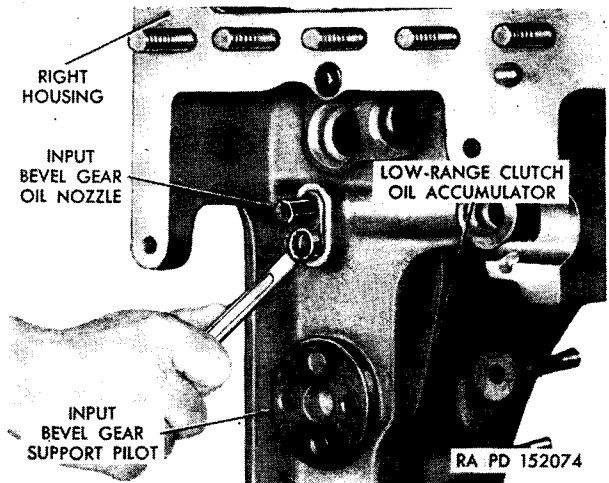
Removing or installing input-bevel-gear oil nozzle.
